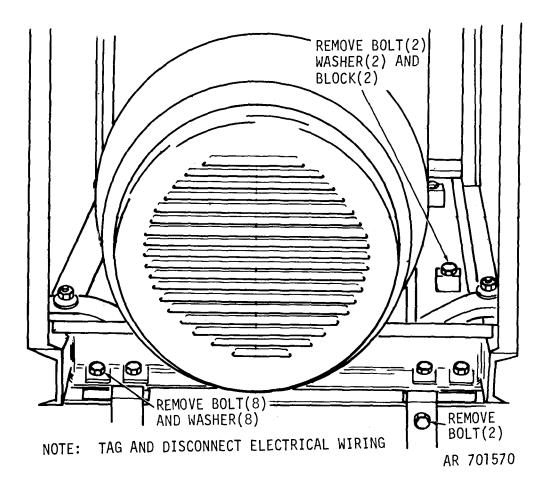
Engine, control panel, and generator-welder, removal and installation.
